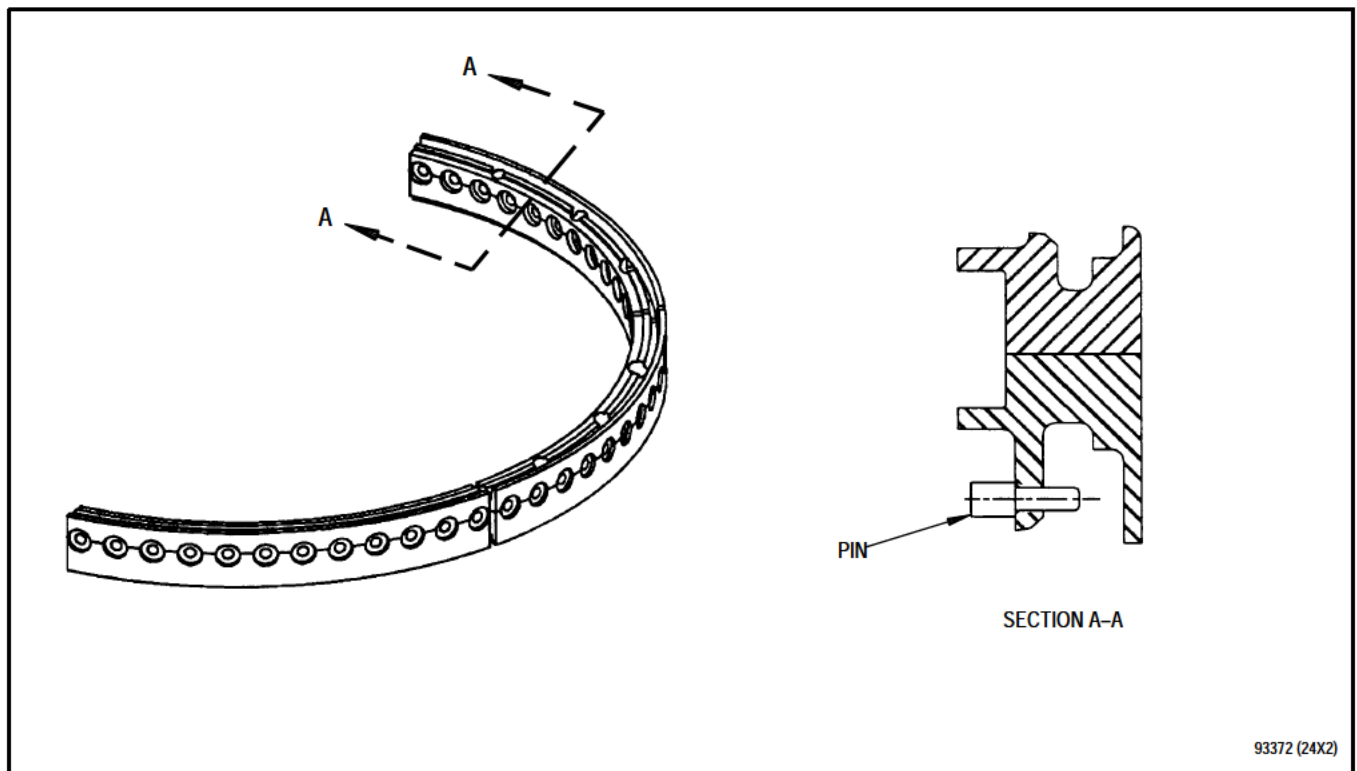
Fourth, Fifth, and Sixth Stage Compressor Stator Shroud Segment Sets - Pin Replacement
